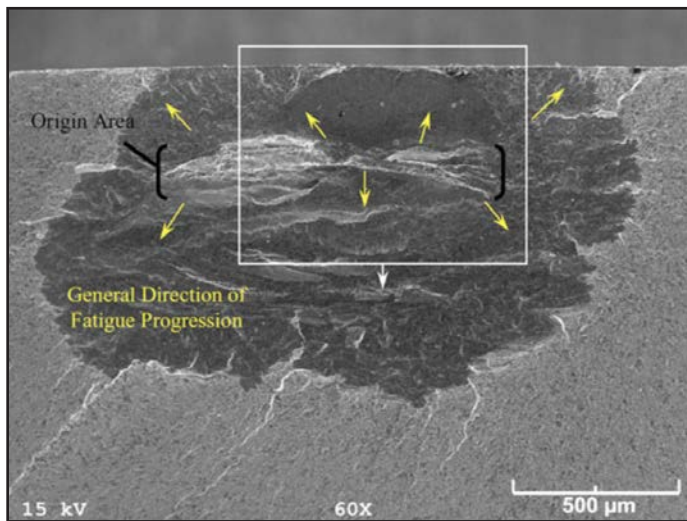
Opened axial crack on intermediate bearing INT-B IR.
